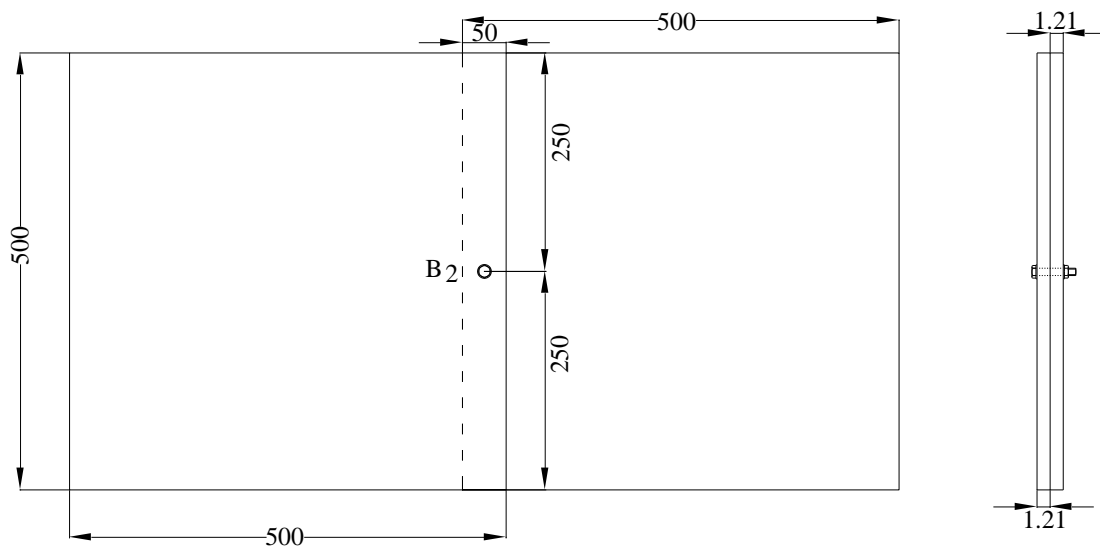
Geometric dimensions of plates with bolted lap joint (Case-4)
